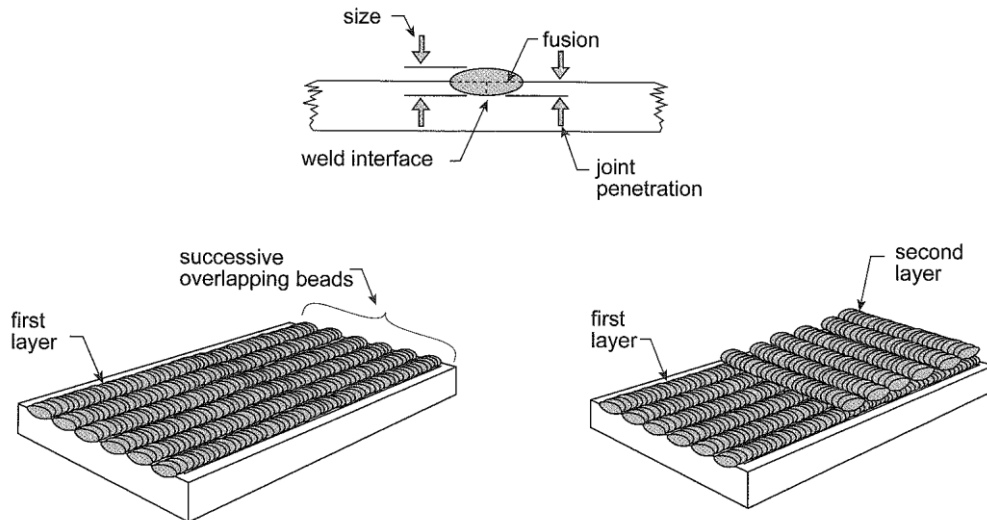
Surfacing welds are commonly used to build up worn parts.
